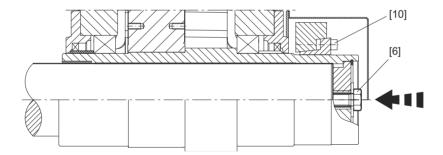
Mounting of hollow shaft gear unit with shrink disc
